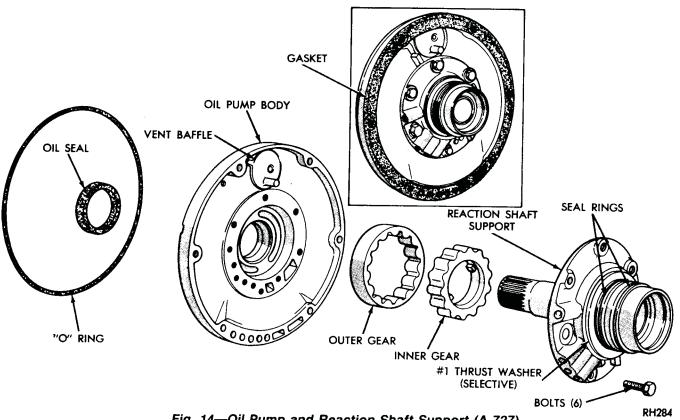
Oil Pump and Reaction Shaft Support (A-727)
